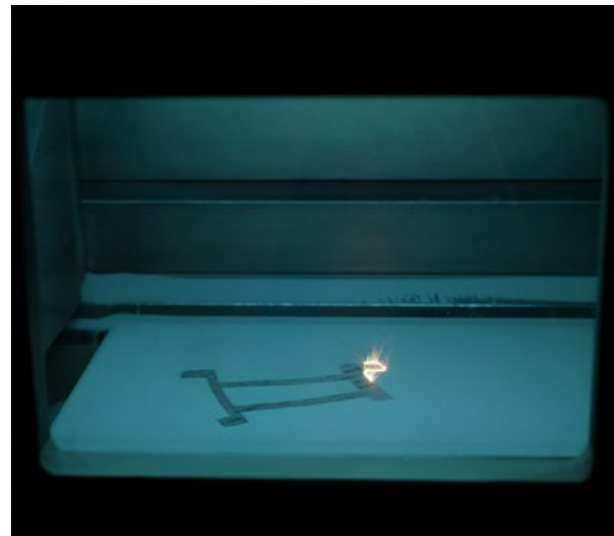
MTU produces components by Selective Laser Melting (SLM) (Courtesy MTU Aero Engines)
